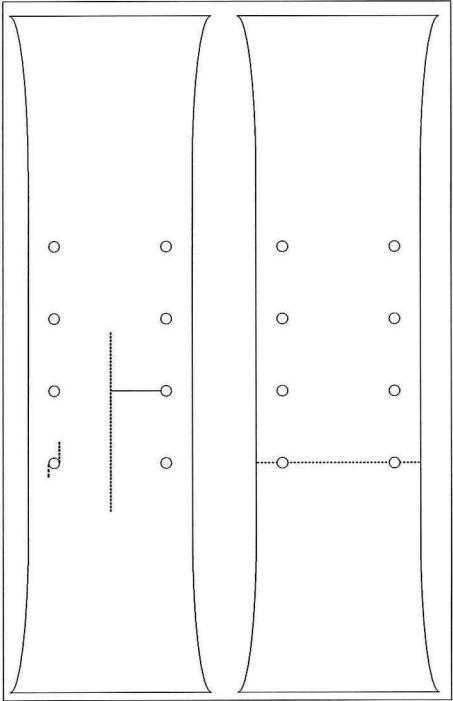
Crack configuration in the coupons after failure. For each coupon, the left image shows the crack configuration in the aluminium flange, the right image shows the crack configuration at the Glare side. Fatigue cracks are represented by a solid line, final failure crack are represented by a dotted line
